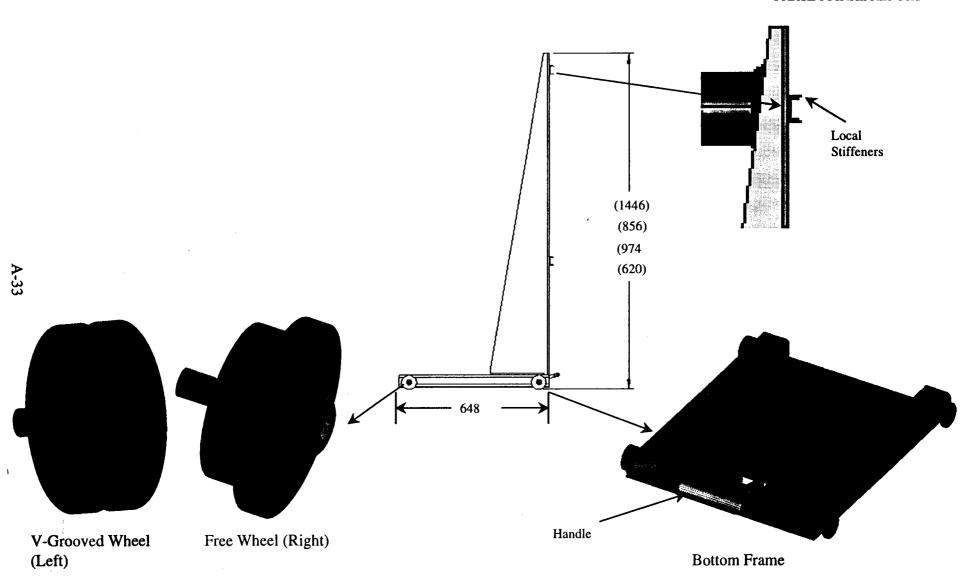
Test, Transfer and Incomer Disconnect Truck Assemblies
